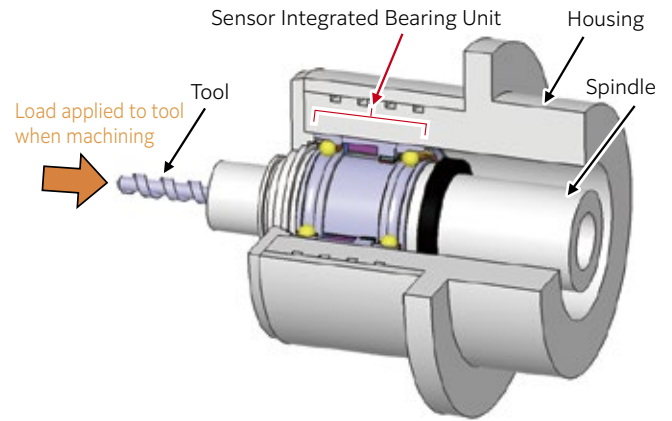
Example of application for the sensor integrated bearing unit on a machine tool spindle
